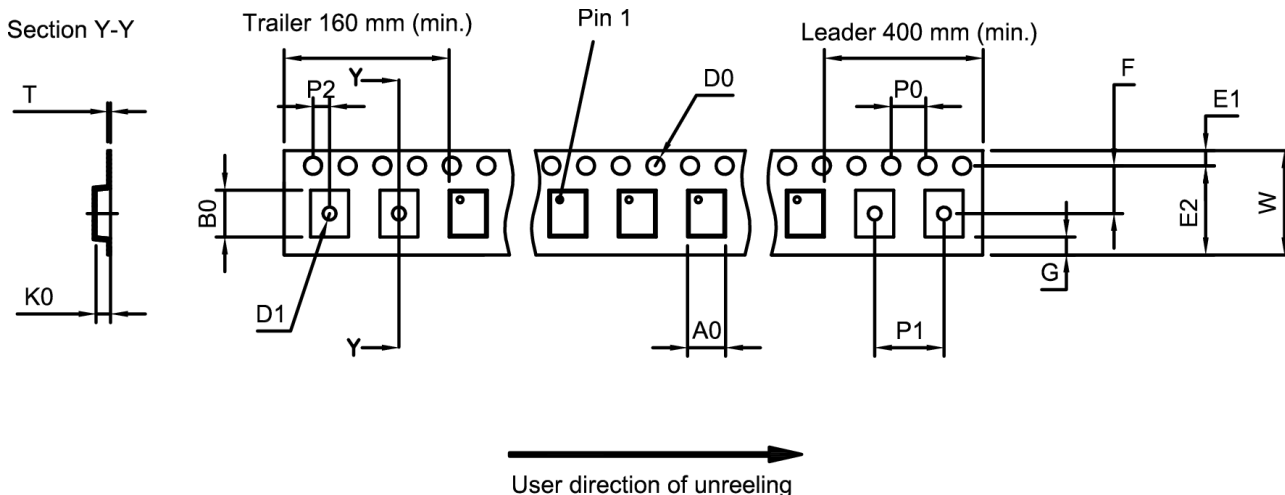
Drawing of tape (first-angle projection) with tape dimensions according to Table 1.
